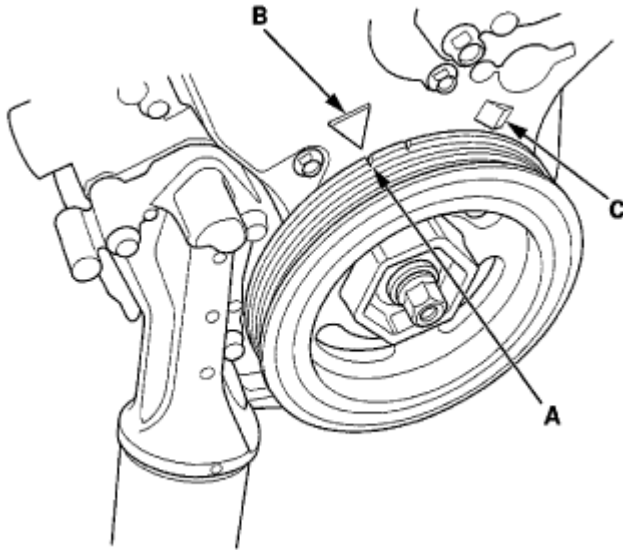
Identifying Crankshaft Pulley Mark Alignment With Pointers
